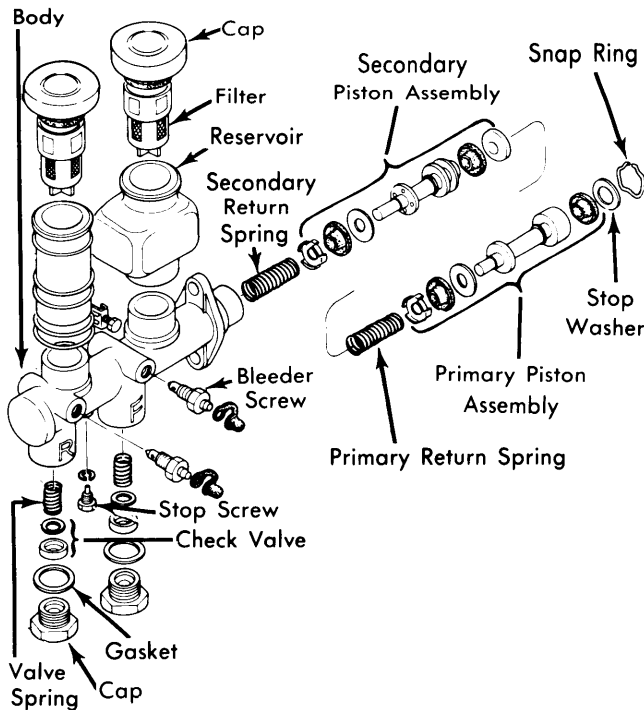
Master Cylinder Reservoir, Body and Piston Assemblies
